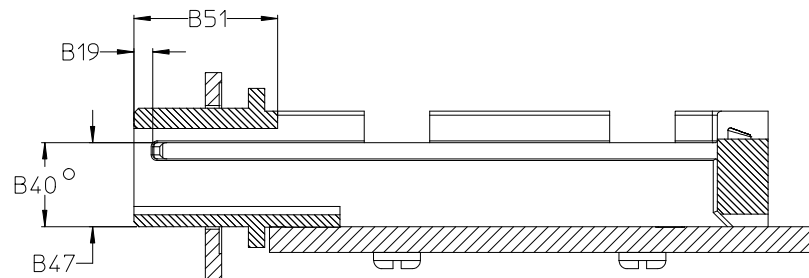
x8 (0°) EMI Guide Housing Assembly Section Side View
